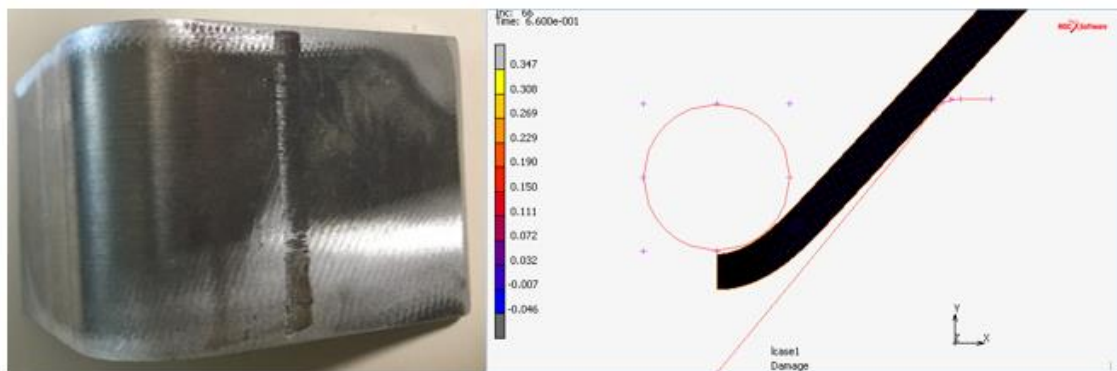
4mm Aluminium with R8mm –Test & Analysis
